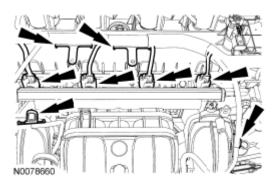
Locating Fuel Injectors And Bolts Courtesy of FORD MOTOR CO.
